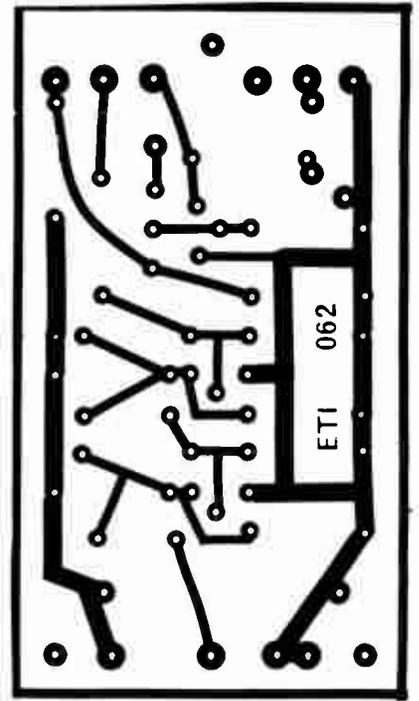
Printed circuit board layout for the tuner. Full size 90mm x 50mm.
